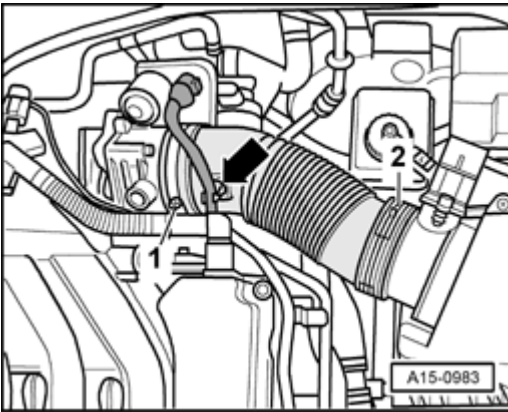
Loosening Hose Clamps And Removing Air Hose Between Air Cleaner Housing & Throttle Valve Control Module -J338-
